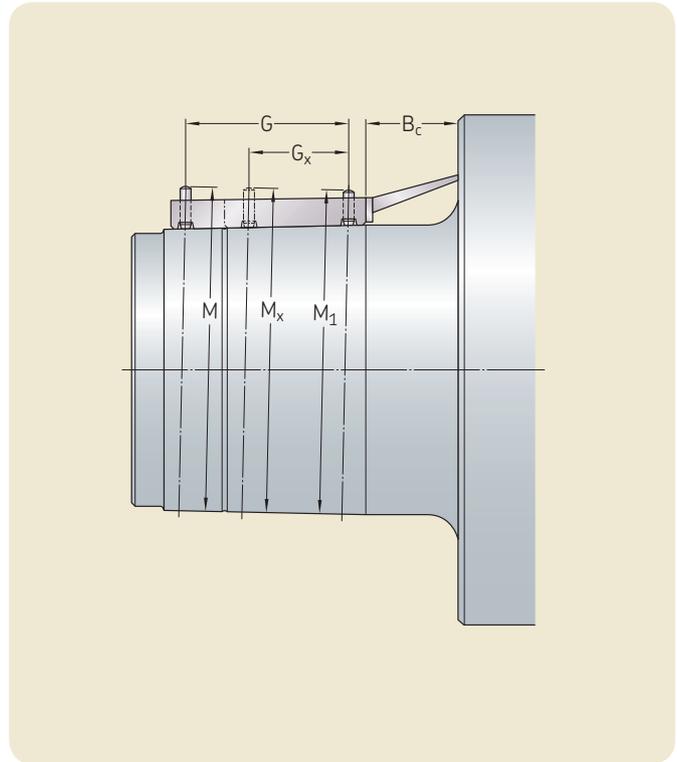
Checking straightness with the SKF 9205 taper gauge.
